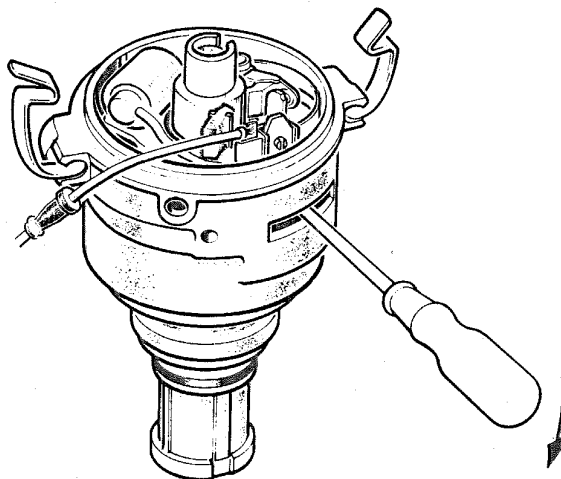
Dismantling procedure: expansion-fit type contact-breaker sub-assembly
